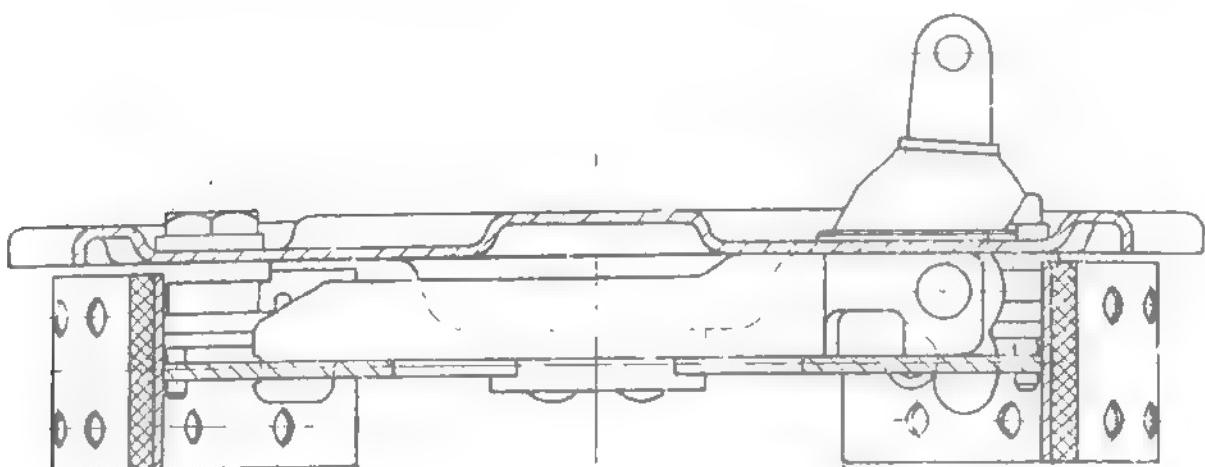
REAR WHEEL BRAKE ANCHOR PLATE.
